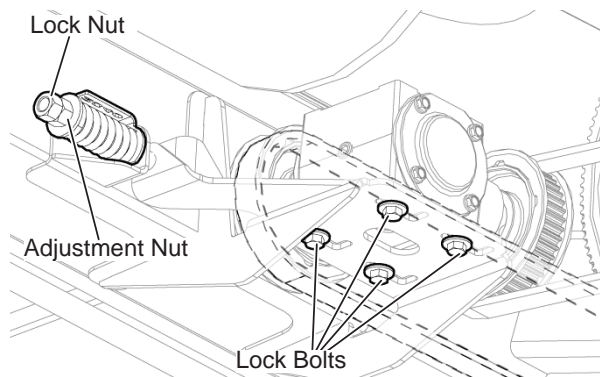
Left Draper Drive Belt 2 Tension Adjustment
